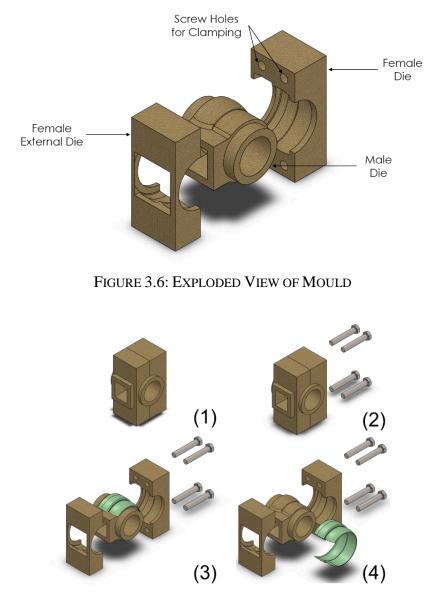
DISASSEMBLY OF MOULD AND PART
